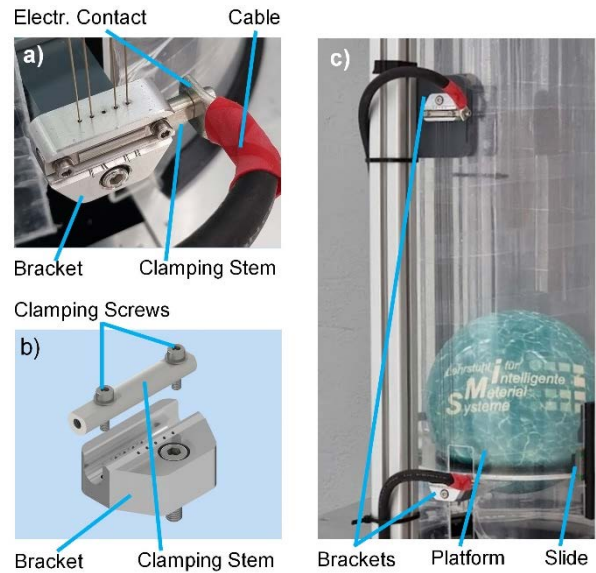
a) SMA bundle (bottom bracket) with 2AWG wire attached to the clamping bolt, b) image of the CAD design of the clamping bracket, c) corresponding SMA bundle attachment at top (frame) and bottom (catapult platform).
